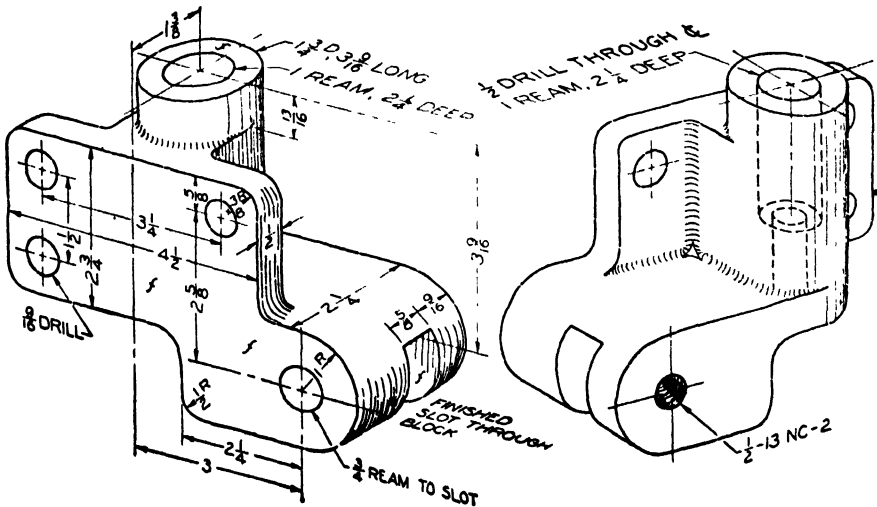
Prob. 277. Make a working drawing of the slide arm bracket. Semisteel casting.
